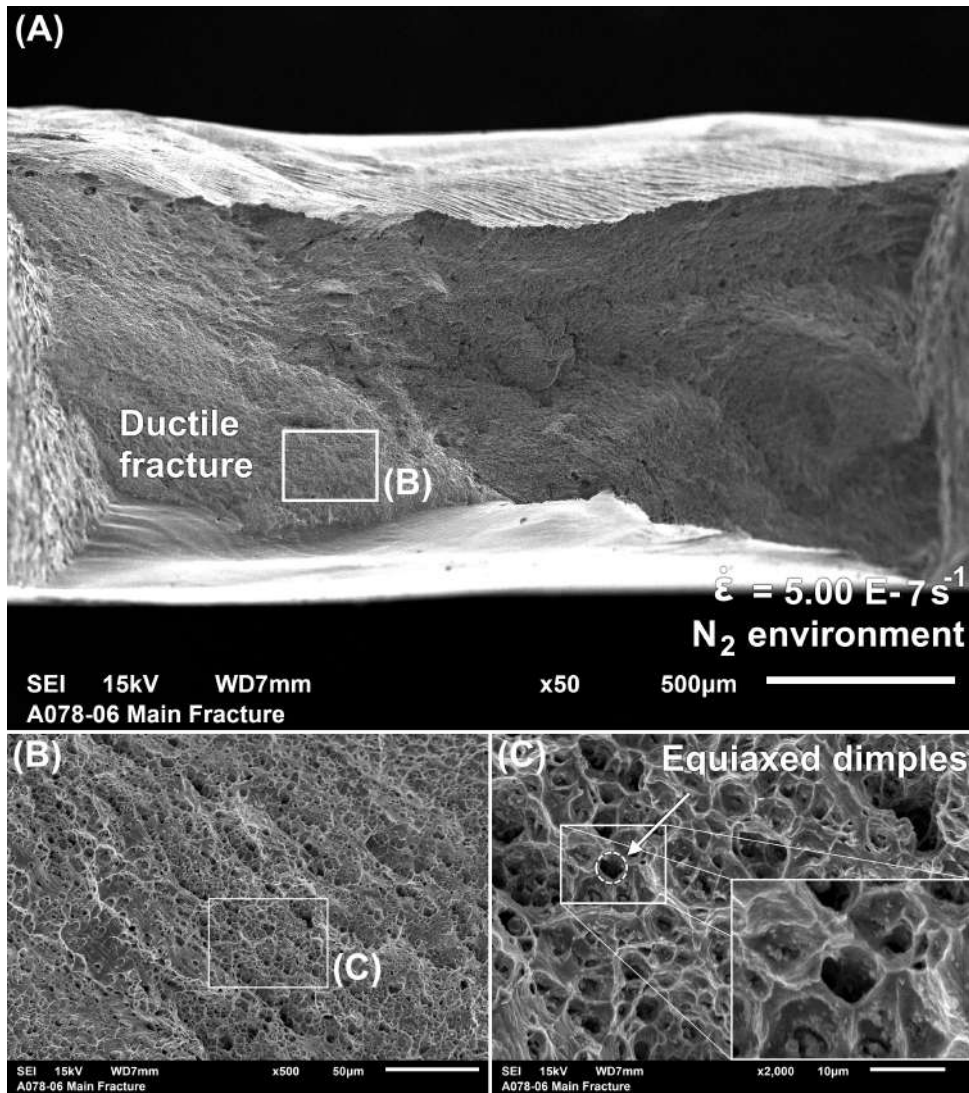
Main fracture surface of a tapered specimen tested under $\dot{\epsilon} = 5.00 \text{ E-}7 \text{ s}^{-1}$ in an inert N_2 environment. (A) General overview of the transgranular fracture with (B-C) its ductile-aspects of the fracture regions.
